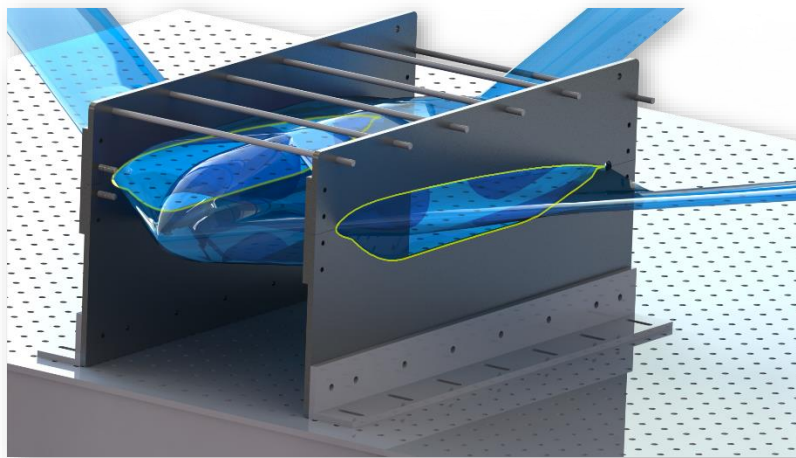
LINE OF CONTACT BETWEEN AIRCRAFT AND TEST FIXTURE
